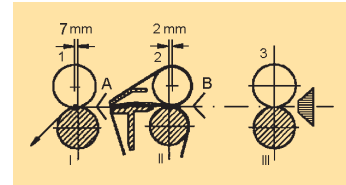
Fig. M: Fronthang of front top roller and backhang of middle top rollers and arrangement of condensers
